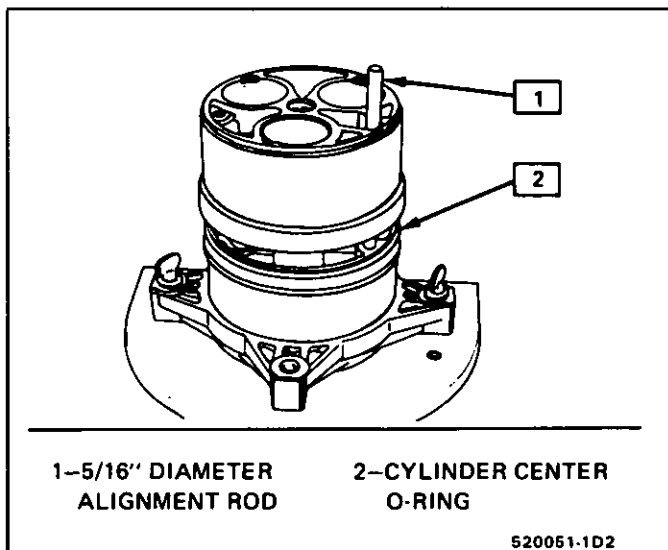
Cylinder Alignment Rod Through Cylinder Halves
